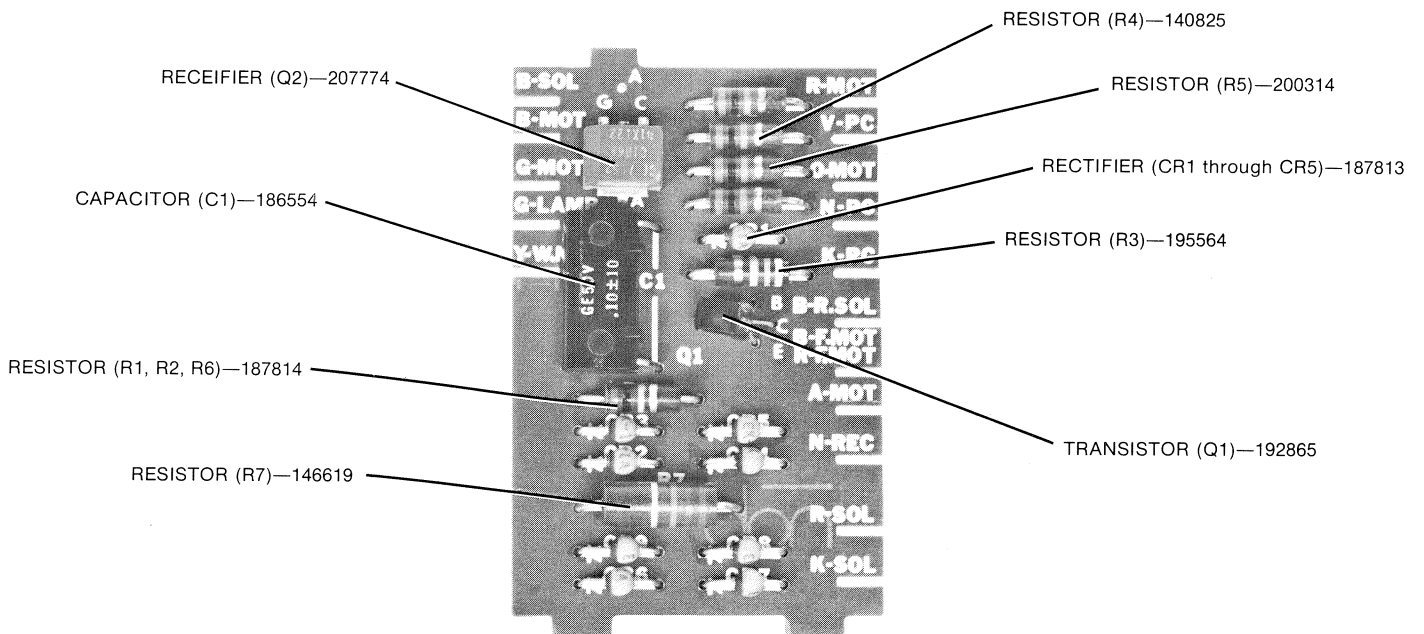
COMPONENT BOARD ASSEMBLY—197399
